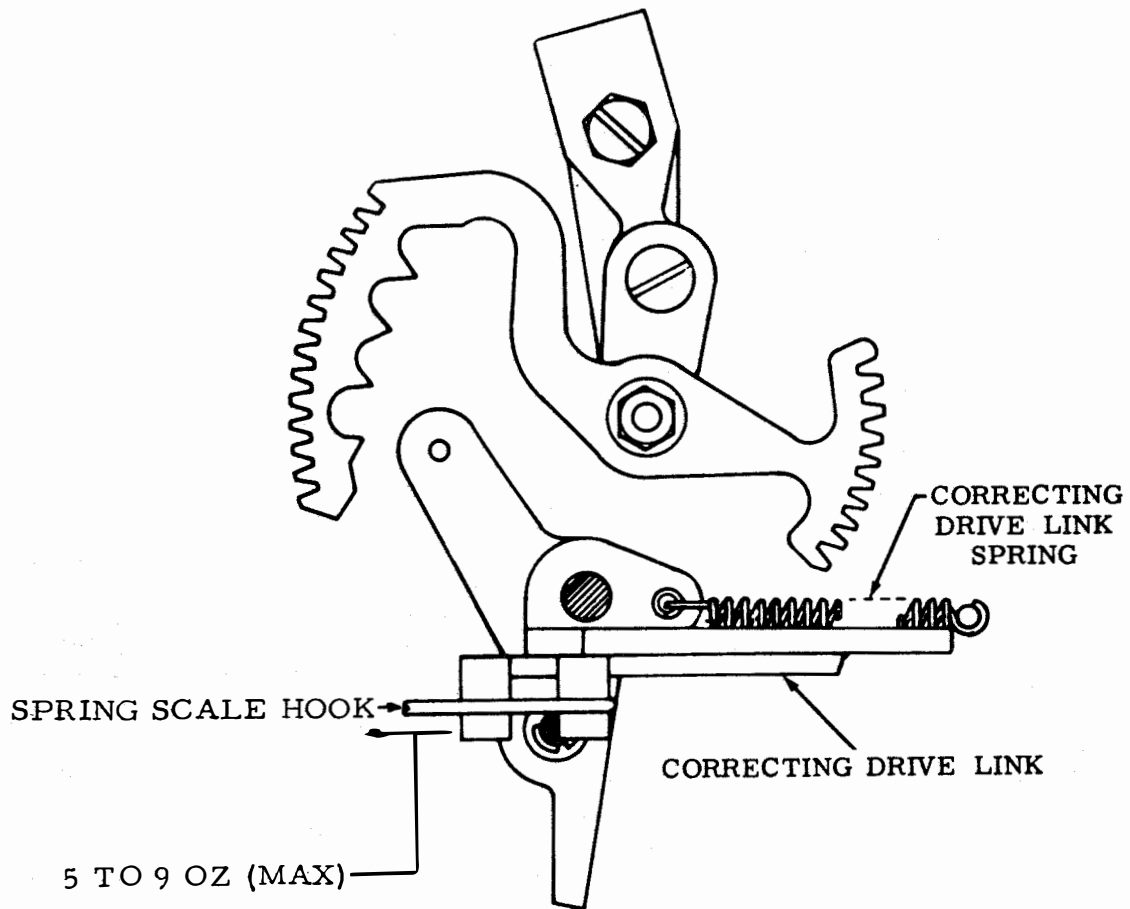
Correcting Drive Link Spring (Non-Yielding), Top View
